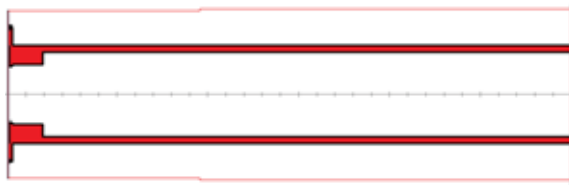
Scaled drawing of the 8 1/2" drillstring.
